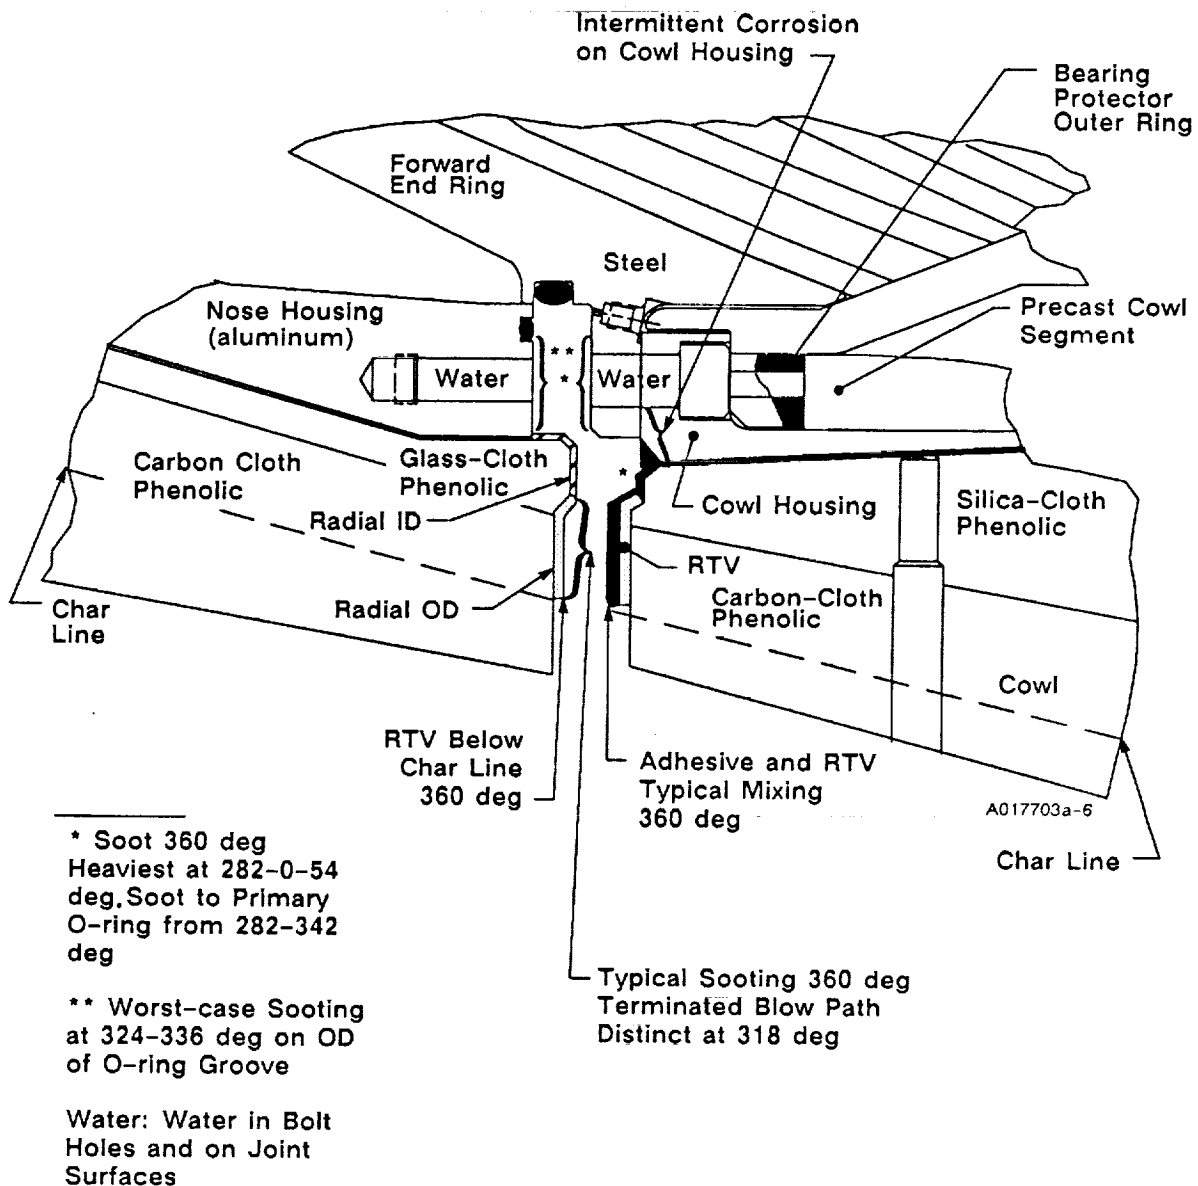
STS-28A Nose Inlet Housing/Flex Bearing Joint
